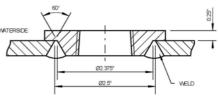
Typical method for fitting a Fusibile Plug bush to Steel Fireboxes
